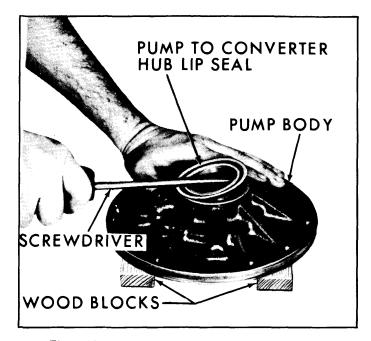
Removing Pump to Converter Hub Lip Seal
